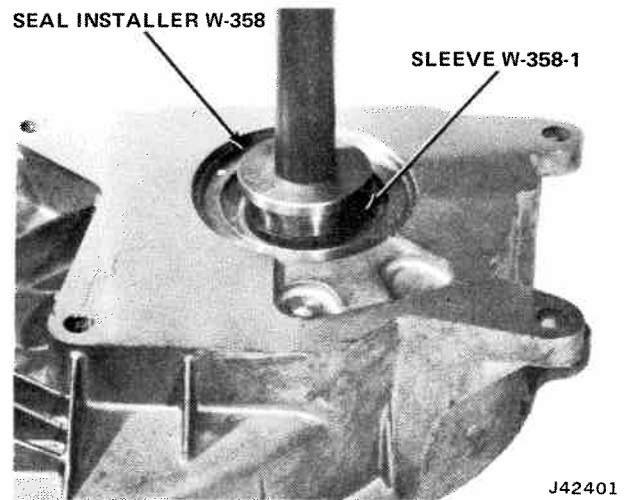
Installing Drive Sprocket Front and Rear Oil Seals
